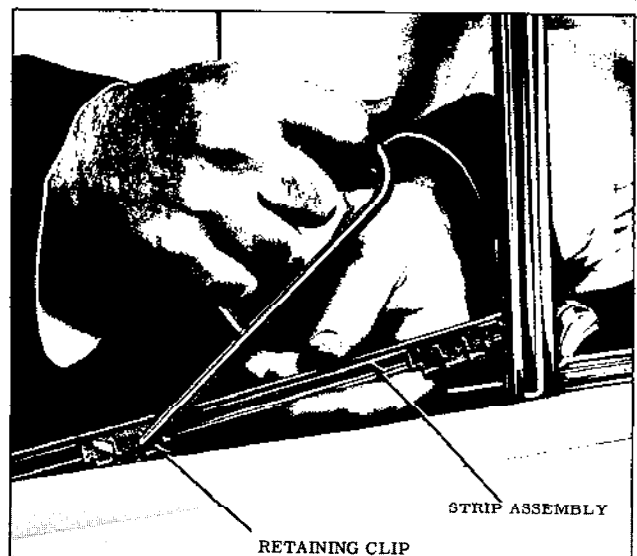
Door Window Glass Run Channel Inner and Outer Strip Assemblies (Outer Strip Shown - Inner Typical)
